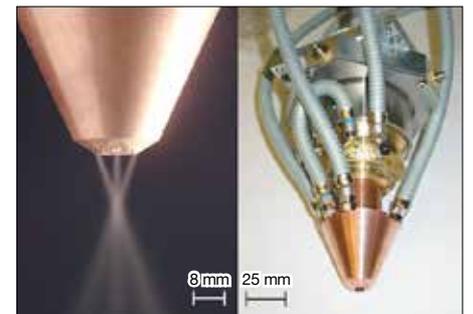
Processing head with a three beam powder feed nozzle; nozzle-tip and powder beams (left), nozzle and adjustment unit (right)
